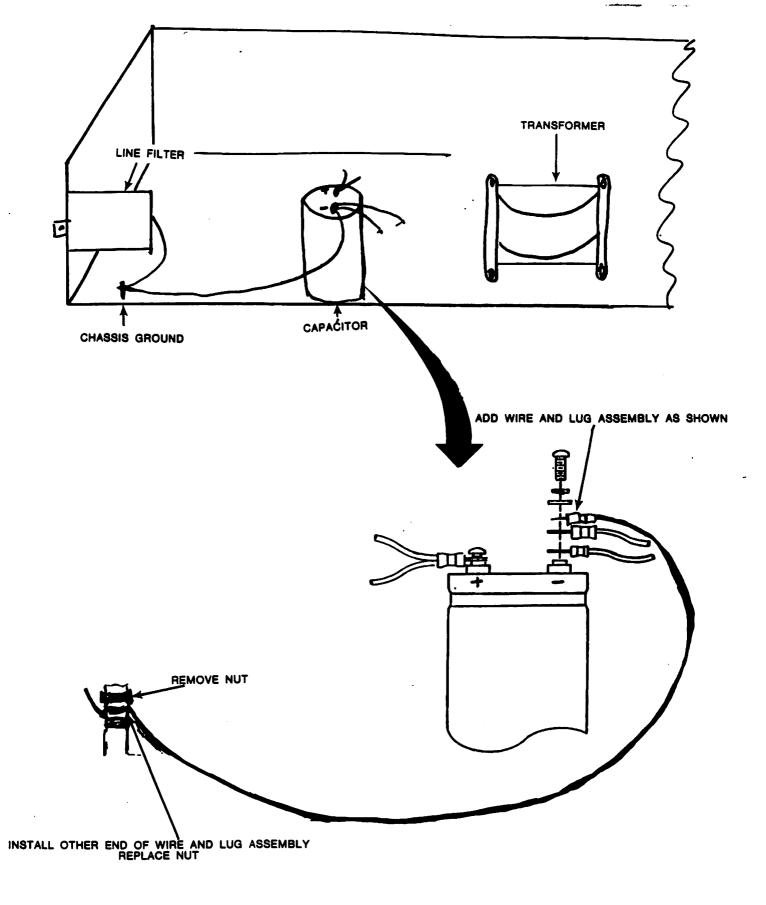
TAPE DRIVE, SIDE VIEW WIRE AND LUG ASSEMBLY INSTALLATION
